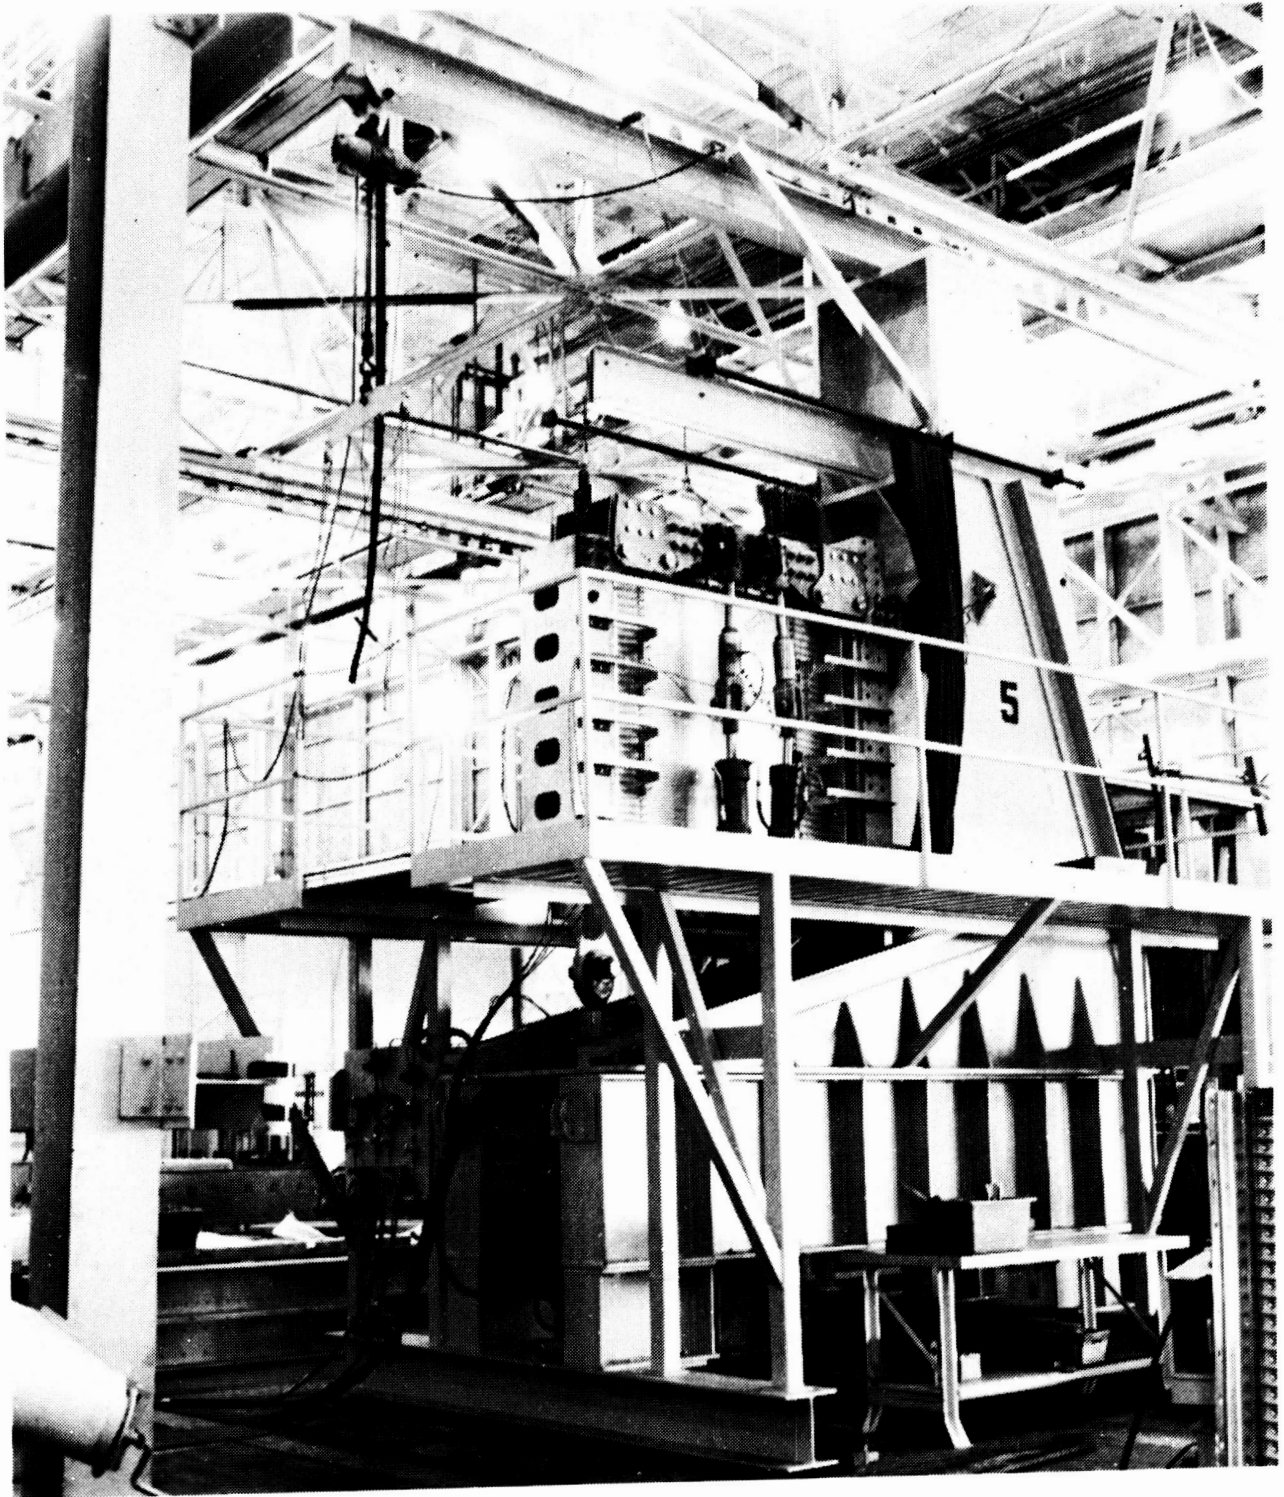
SHEAR PANEL TEST FIXTURE
